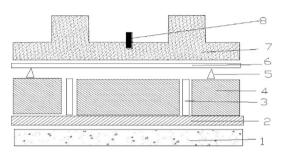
Schematic Diagram of Explosive Weld Device.
